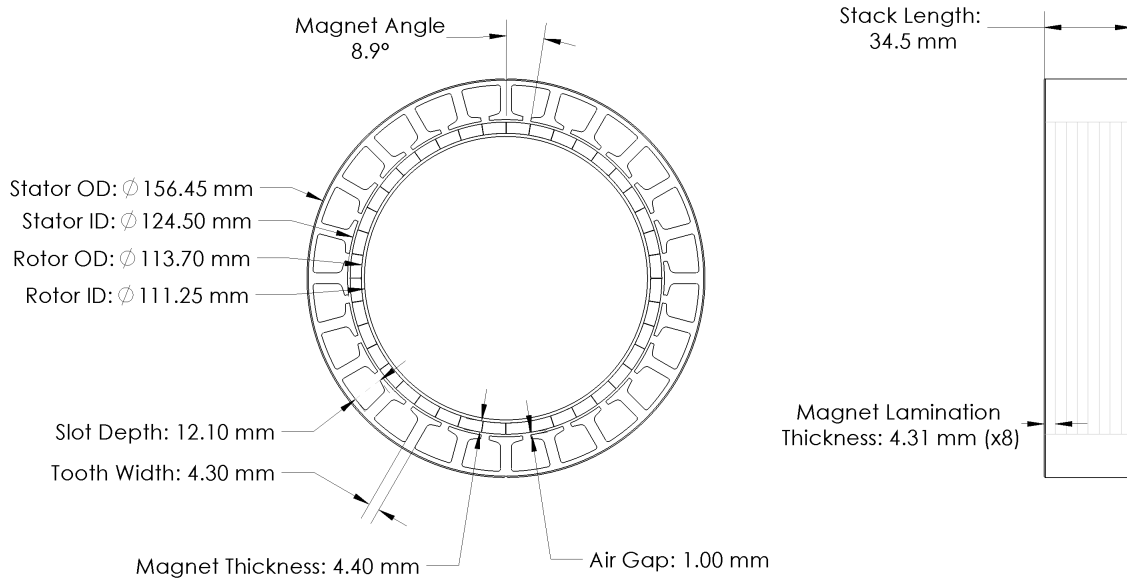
Drawing and measurements of primary geometries on the prototype motor
